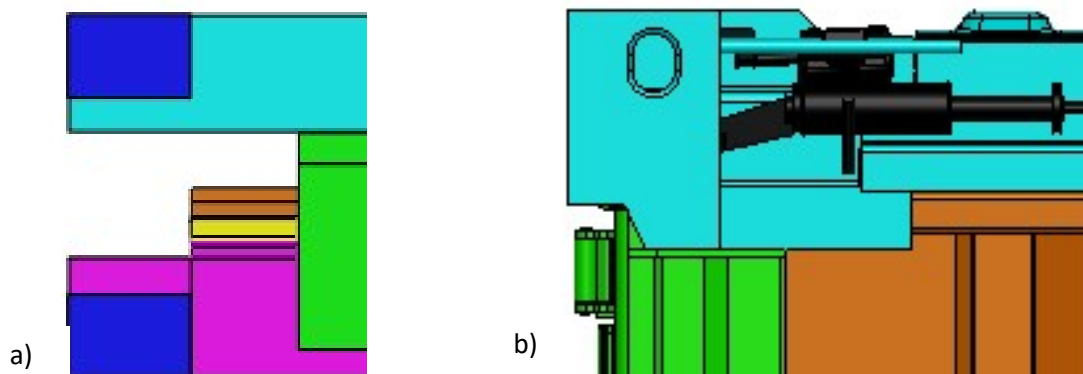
a) Folded mock-up side view detail; b) Top fitting side detail
